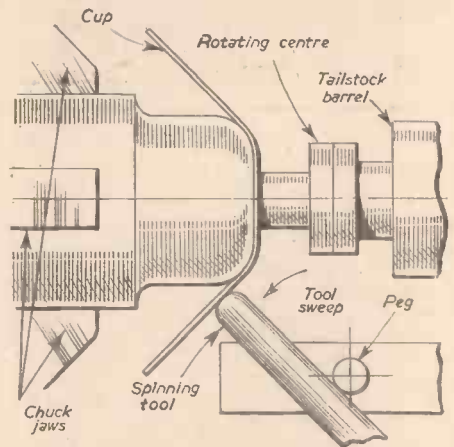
The sheet set up on the former and partly spun over by the tool shown in the foreground.
